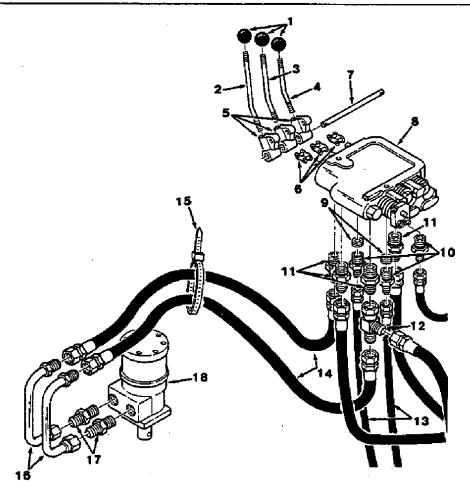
CONTROL VALVE AND SIDE BRUSH MOTOR GROUP
